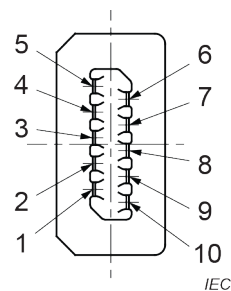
Fixed connector pin assignment for Type C, front view of connector
